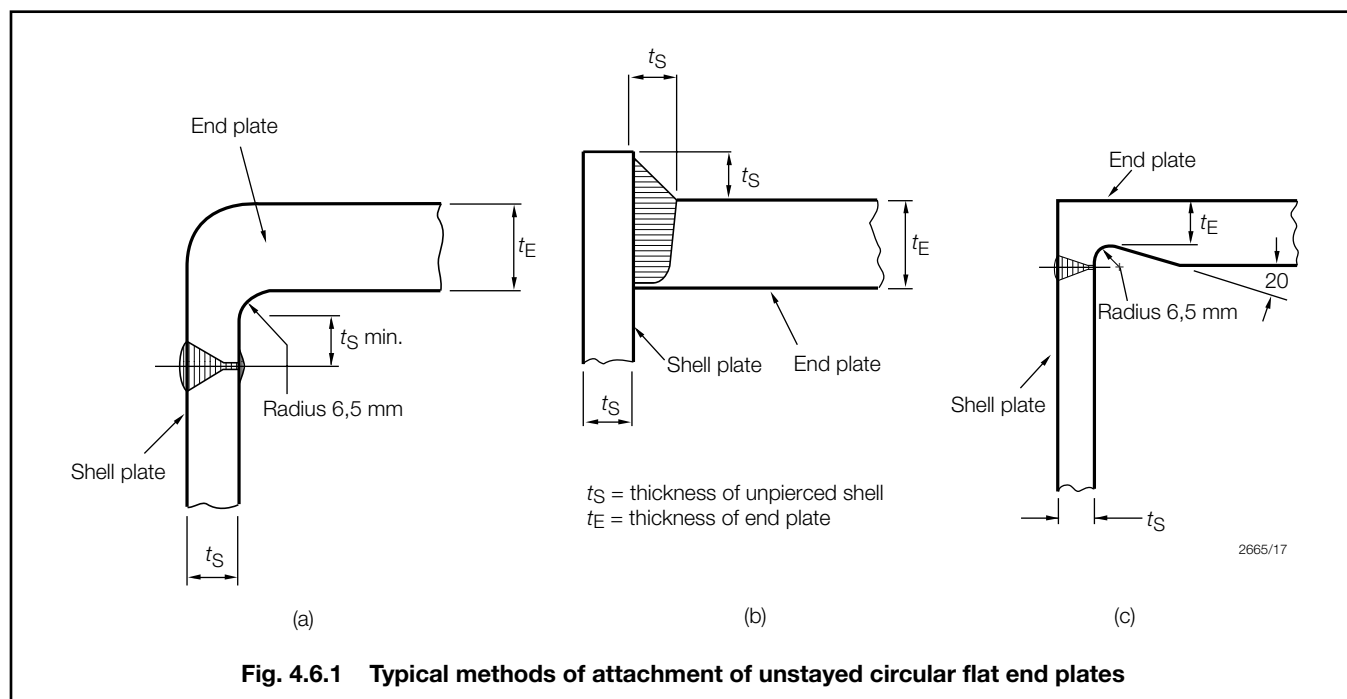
Typical methods of attachment of unstayed circular flat end plates
